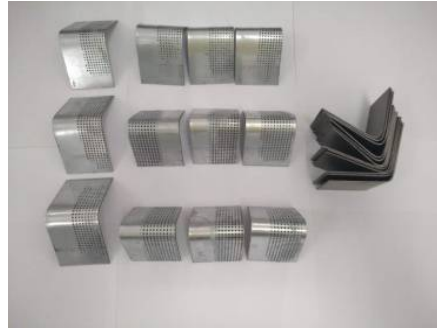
The workpiece after the bending. The bending angle is  $90^\circ$ , the material is DP780 of 1.5 mm.
